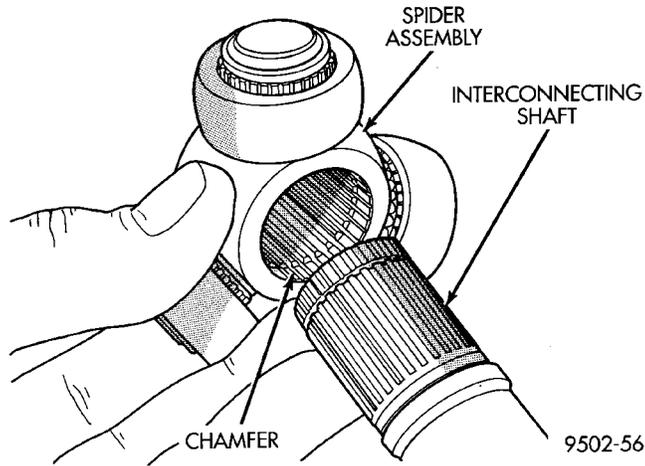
Spider Assembly Installation on Interconnecting Shaft
